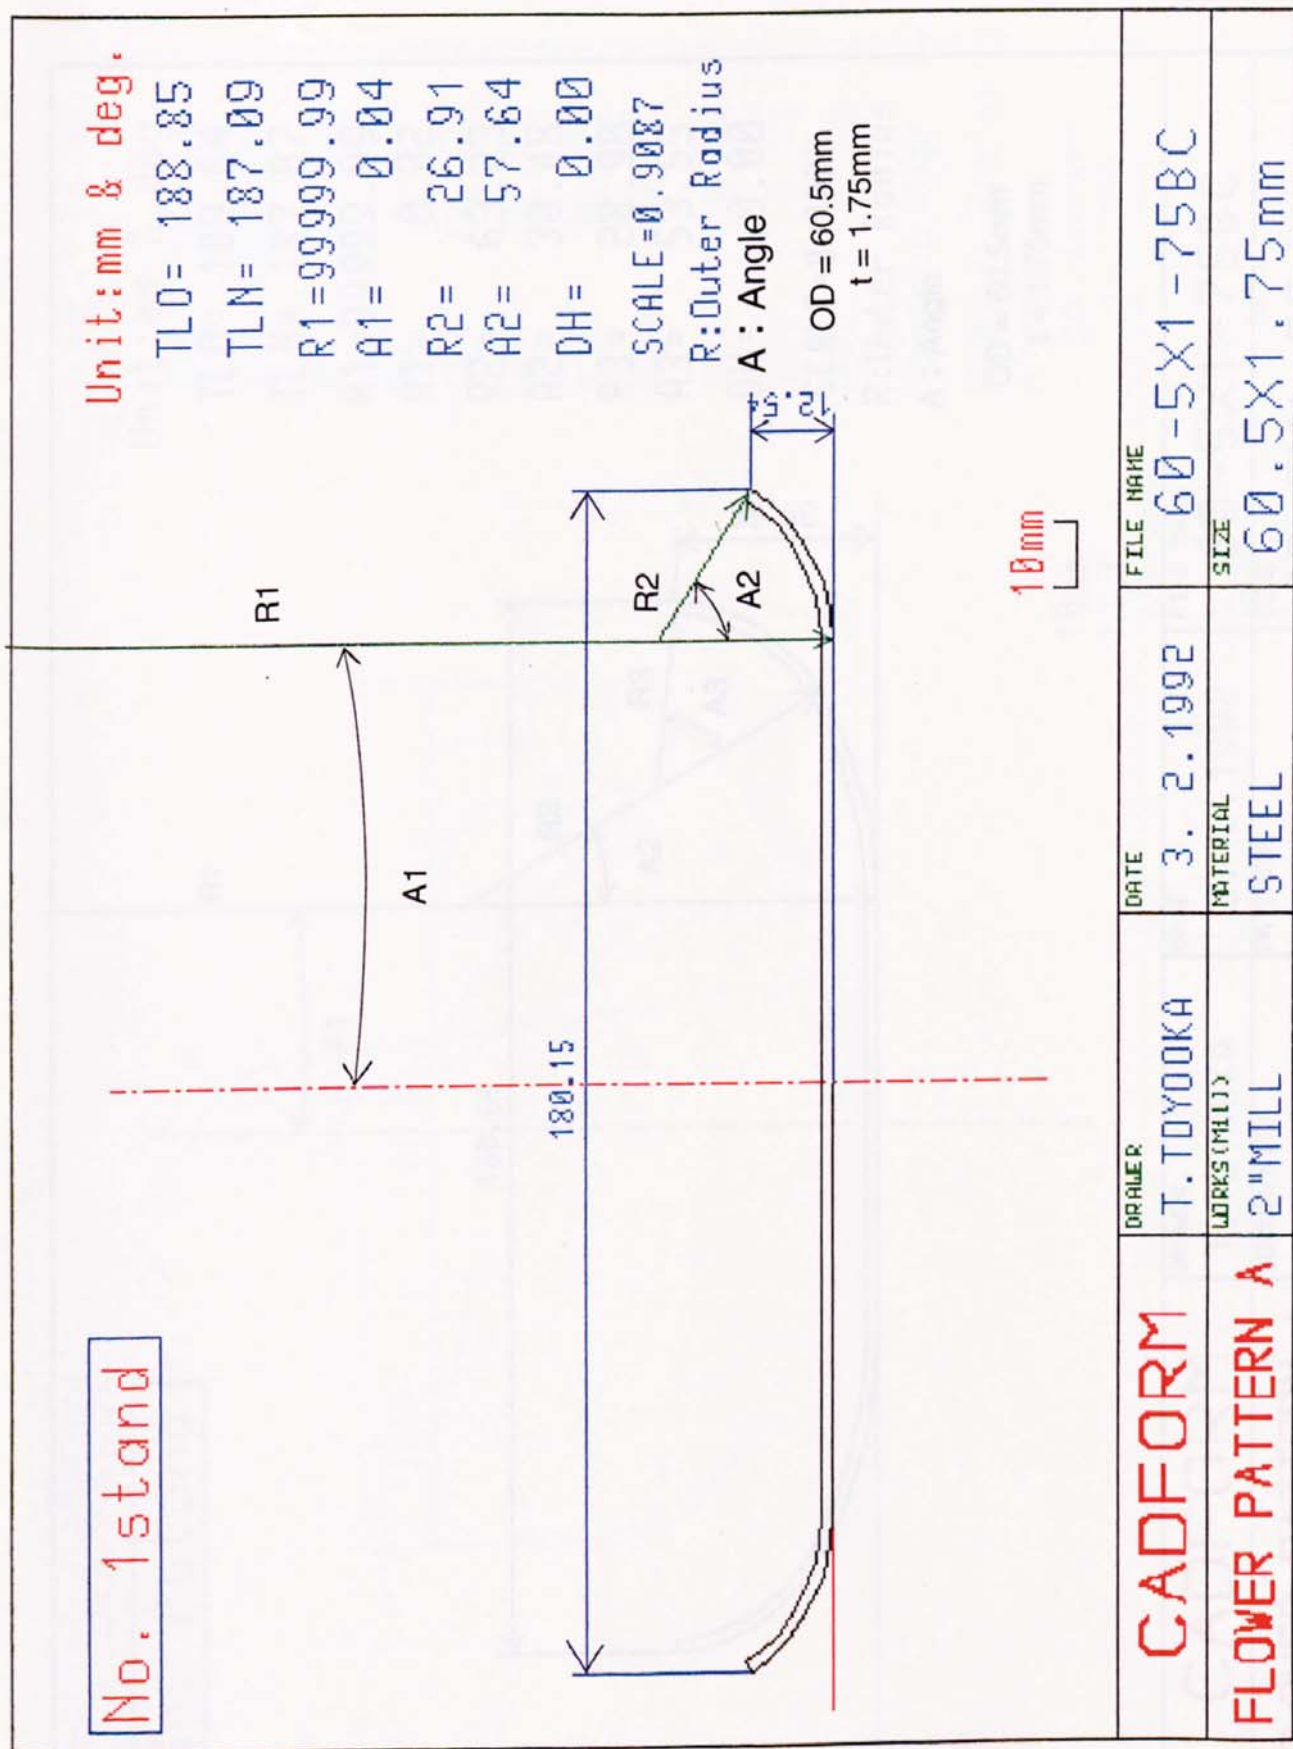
Drawing of planned forming flower at 1st pass by flower pattern A using the CADFORM system
